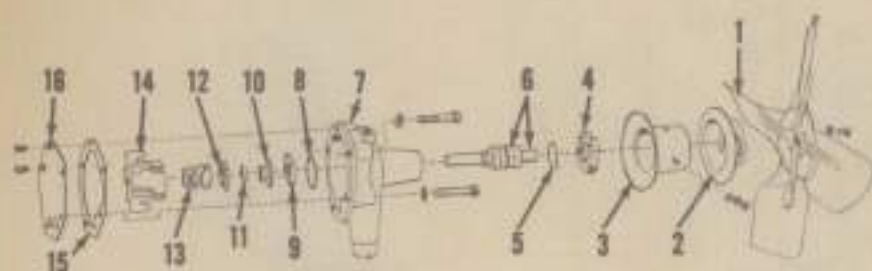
Exploded view of D-14 and D-15 non-diesel water pump and fan assembly.
